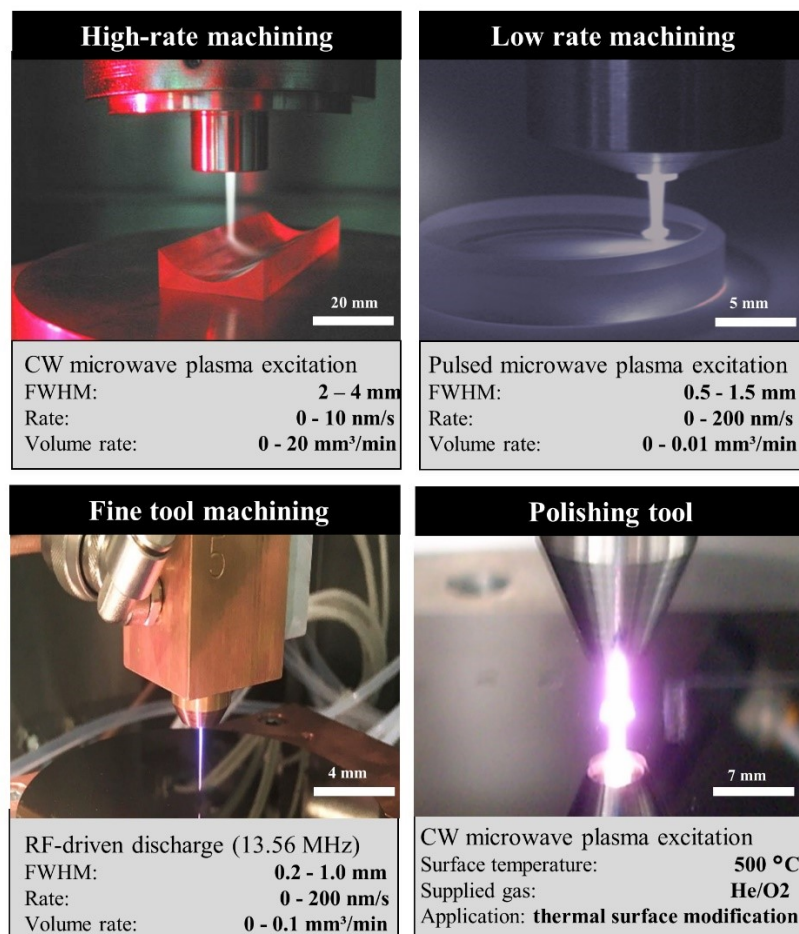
Different types of PJM designed for precision surface machining of optical elements.
